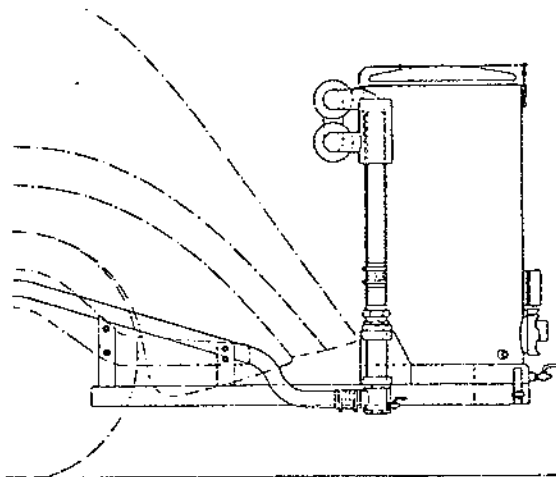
Wood Gas Generator for a Passenger Car (side view).
